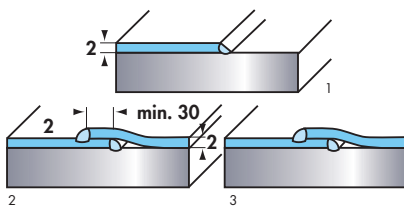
"Wallpapering" by GTA cold wire or hot wire welding "without webs", overlapping.
